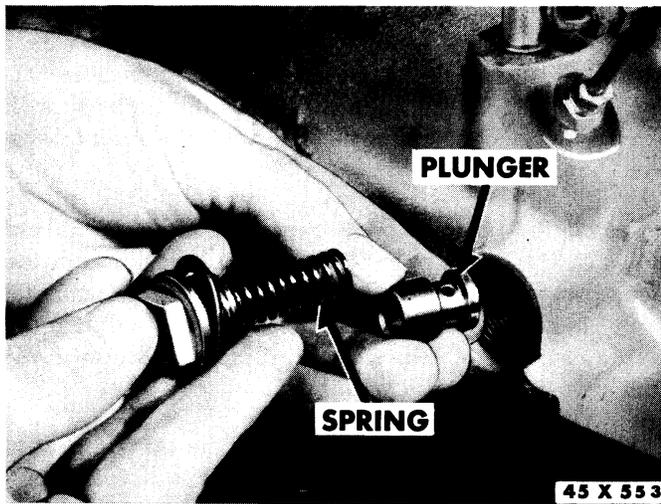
Oil Pressure Relief Valve—6 Cylinder Engine
